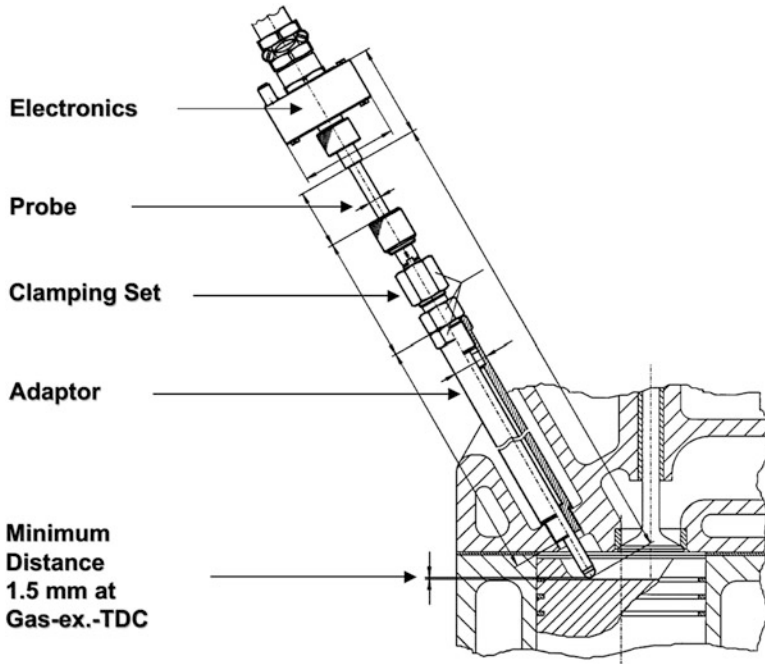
Assembly and mounting of TDC sensor (Courtesy AVL)
